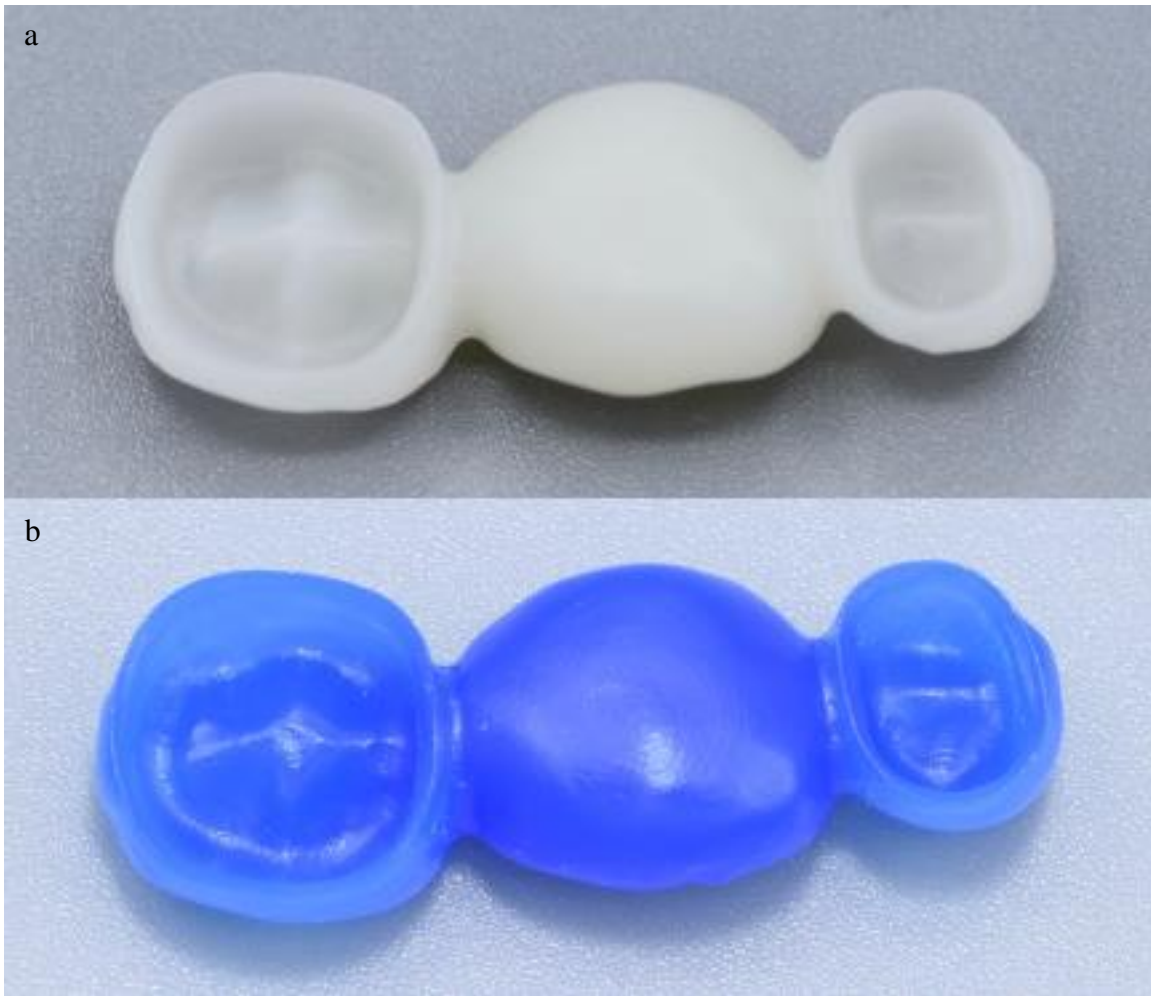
Subtractive Manufactured Patterns: Intaglio surface of patterns fabricated by subtractive manufacturing after removal from billet and sprues -- (a) Vericore PMMA Ivory, (b) Vericore Wax.
